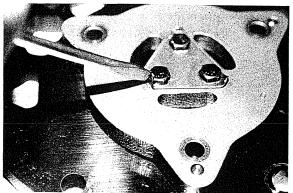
Locking Bolt Retainer, Discharge Valve Seat
